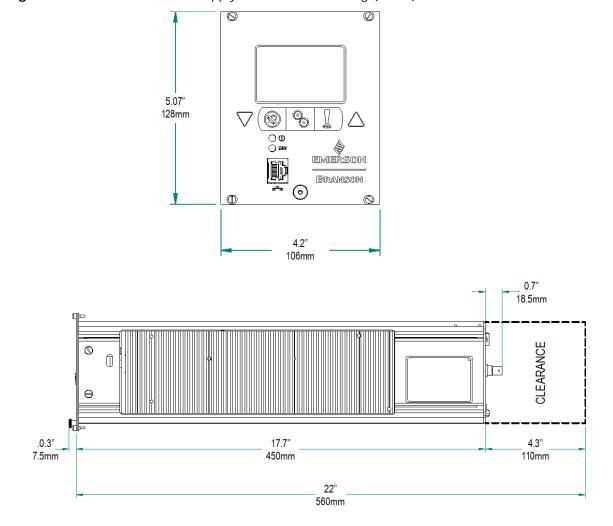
DCX RM S Power Supply Dimensional Drawing (Small)
